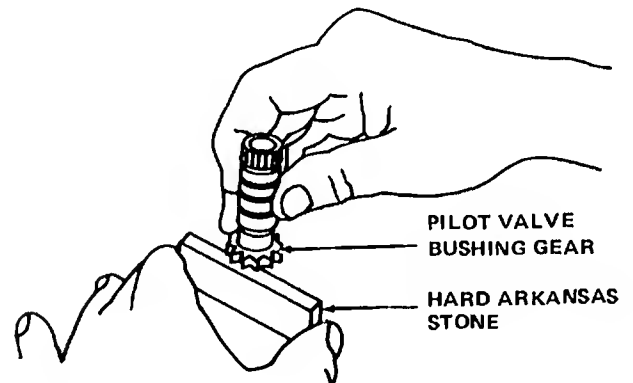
Honing Governor Pilot Valve Bushing Gear
